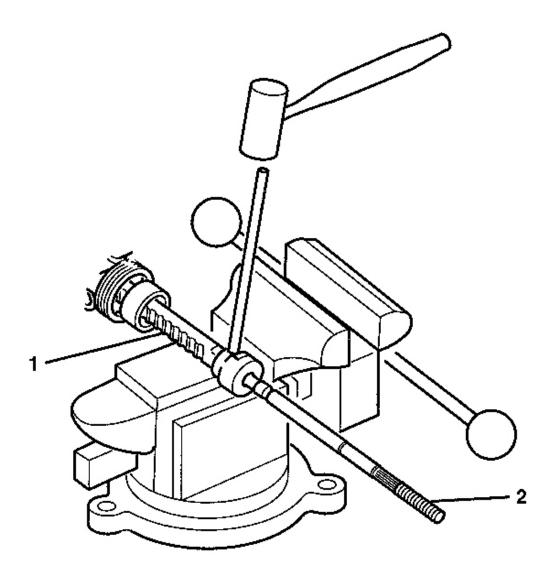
Staking Both Sides Of Female Inner Tie Rod Assembly Housing To Male Rack Courtesy of GENERAL MOTORS CORP.
